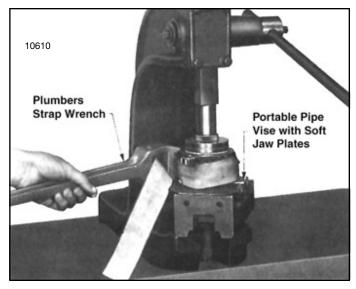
Winding Load Brake Gear Using a Strap Wrench to Set Up Load Brake Spring
